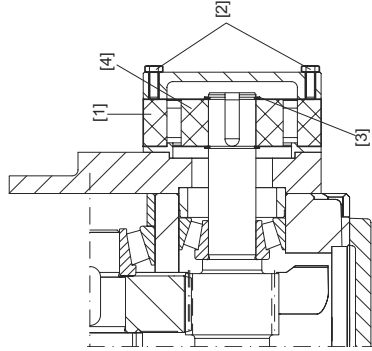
Changing the direction of rotation with backstop mounted outside the gear unit
